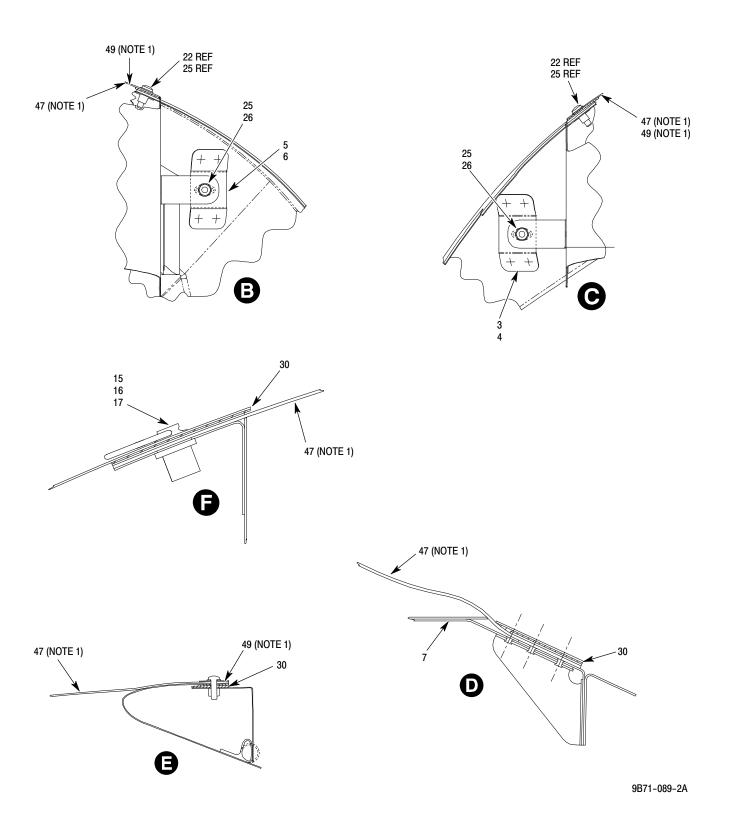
NACA Inlet Assembly Installation (Sheet 2 of 2)
